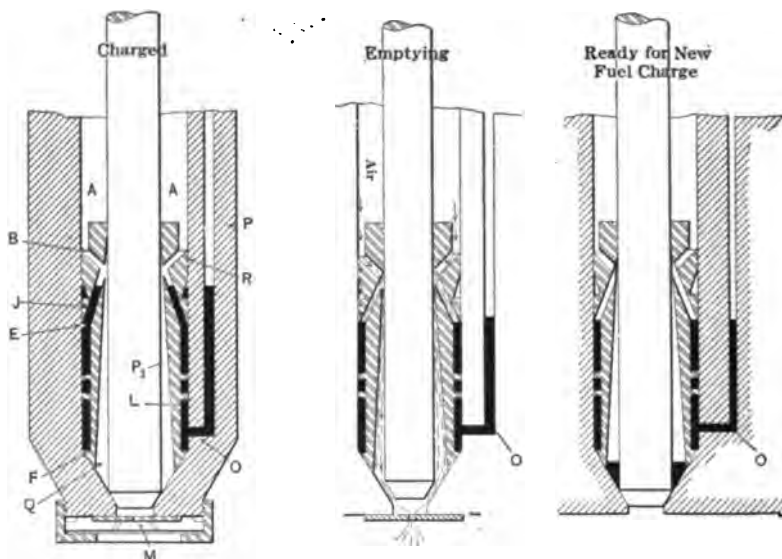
McIntosh & Seymour Diesel Hesselmann fuel valve action.
